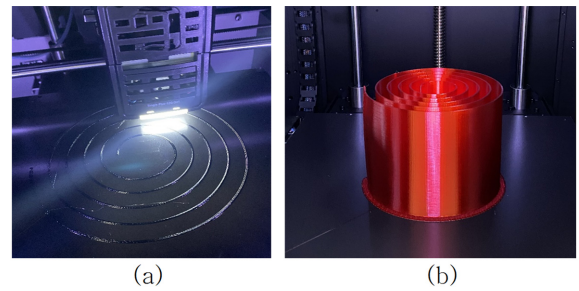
Roll-type 3D printing process; (a) bottom layer (b) output.
